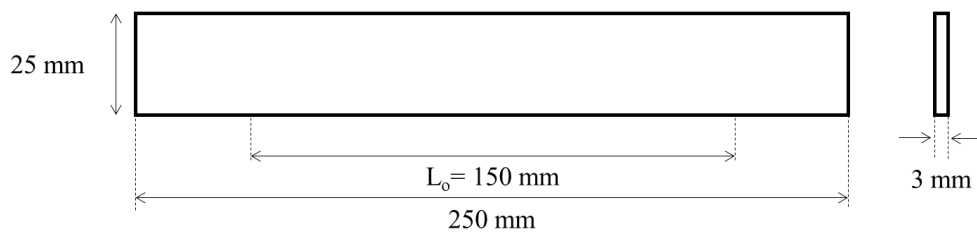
Dimension of tensile test specimen using ASTM D-3039
